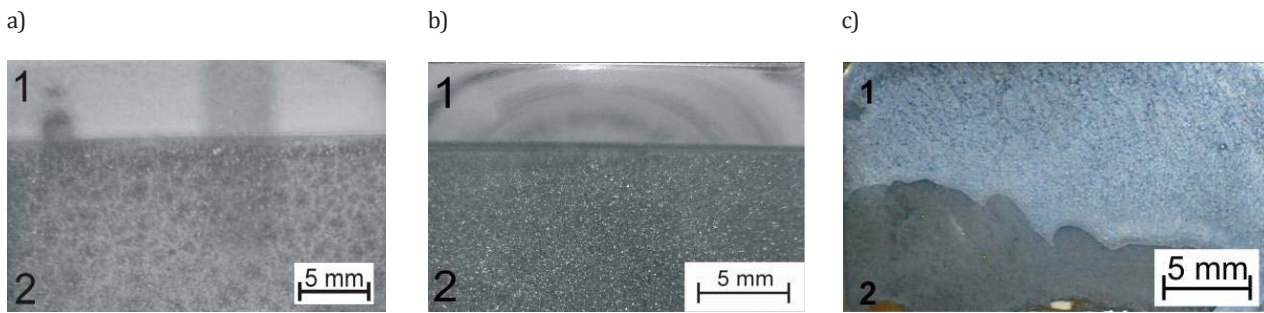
View of sand mold with granular insert (1) placed in its cavity
